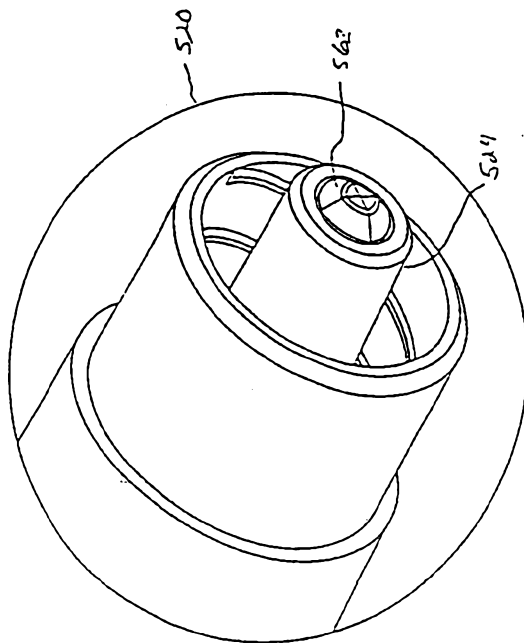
ISO VIEW - ONE HALF ENGAGEMENT POSITION
